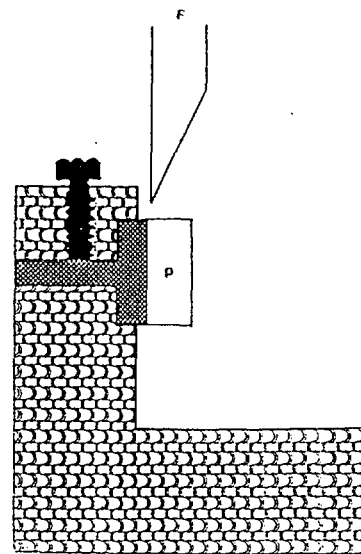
The scheme of the breaking device placed on the specimen mounted in the holder of the testing machine.
